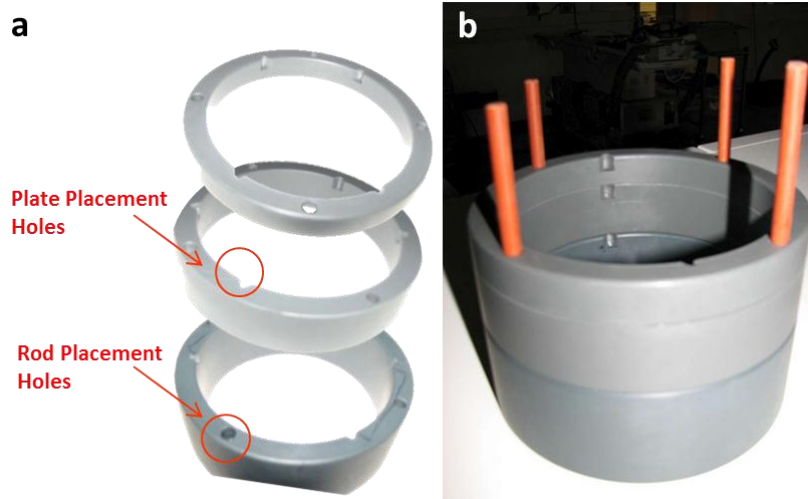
Plate holder rings (a) separated and (b) stacked
